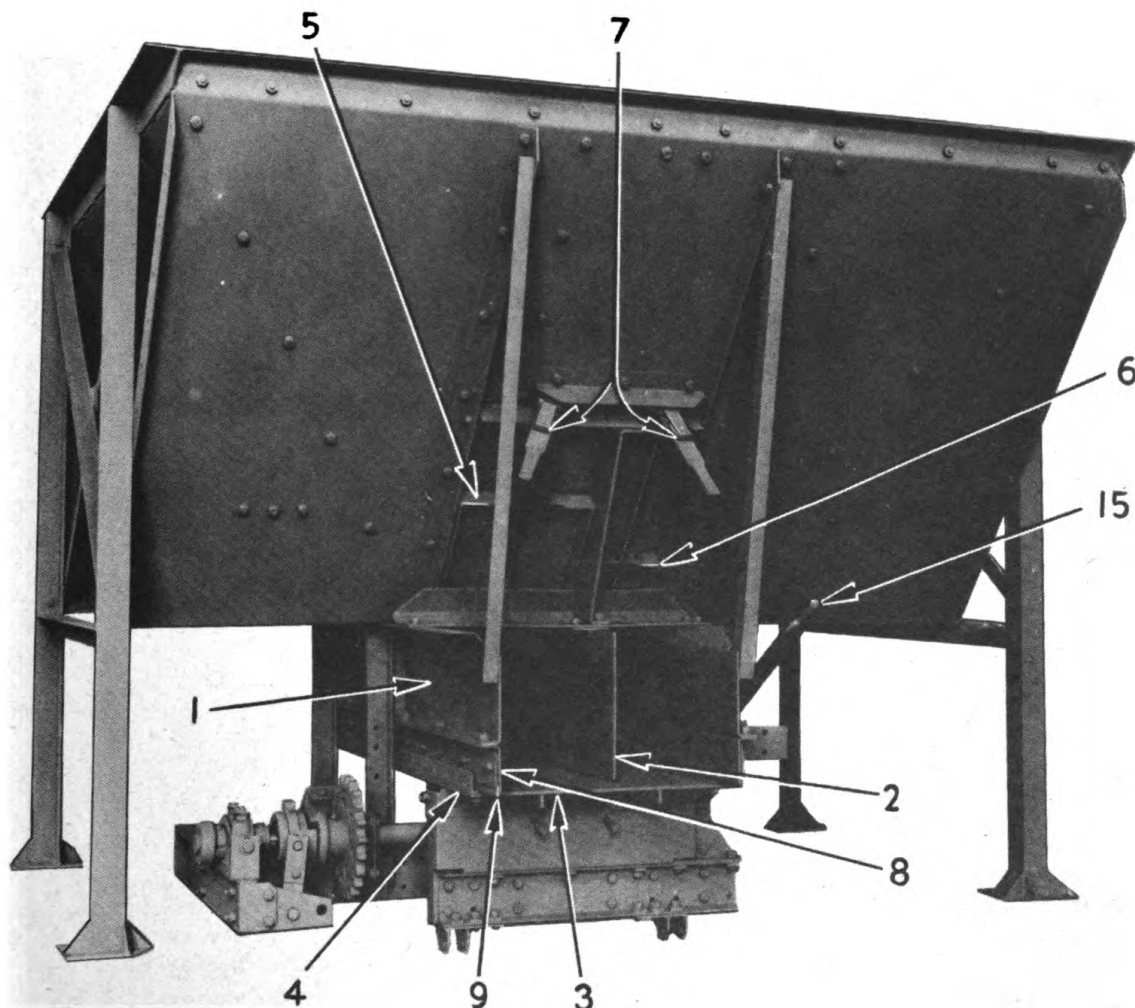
FRONT (DISCHARGE) END OF RECIPROCATING FEEDER AND HOPPER BASE.
